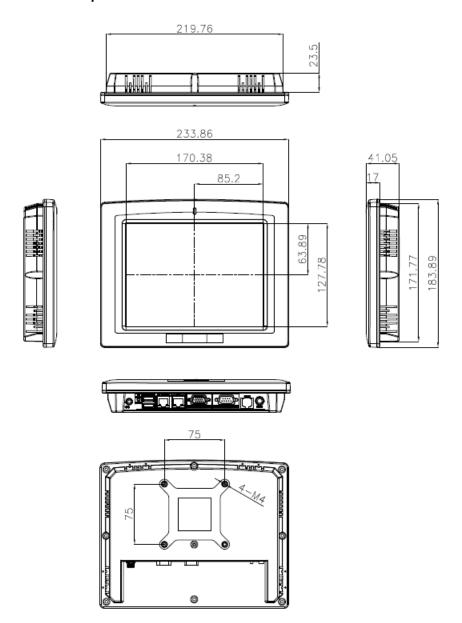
AFL-08A-N26 Dimensions (mm)
